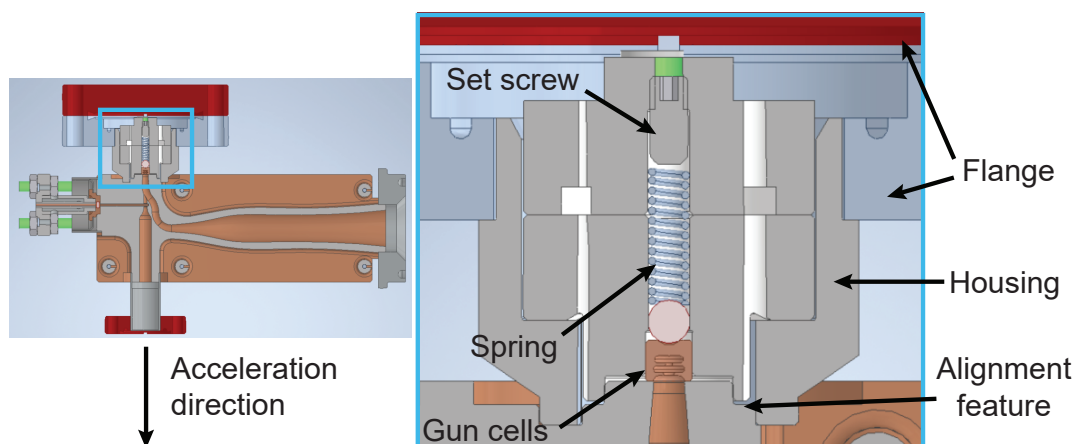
Cross section of the gun assembly focused on the gun mounting and alignment hardware. The gun cells and acceleration direction are indicated. The gun is pressed against the input waveguide using a ceramic ball and spring. The outer housing is brazed to the mode converter block and sealed with a flange. Details of the Gaussian horn and mode converter block can be found in Section 4.2.1.
